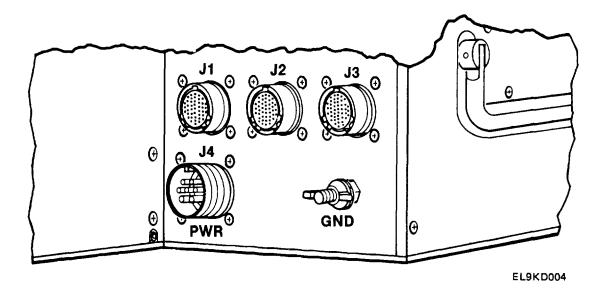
Rear Chassis Connectors, Cut-Away View
